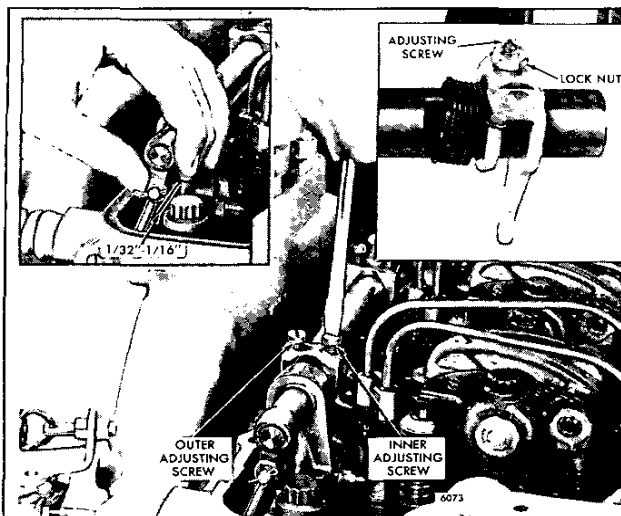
Adjusting Injector Rack Control Lever Adjusting Screws
